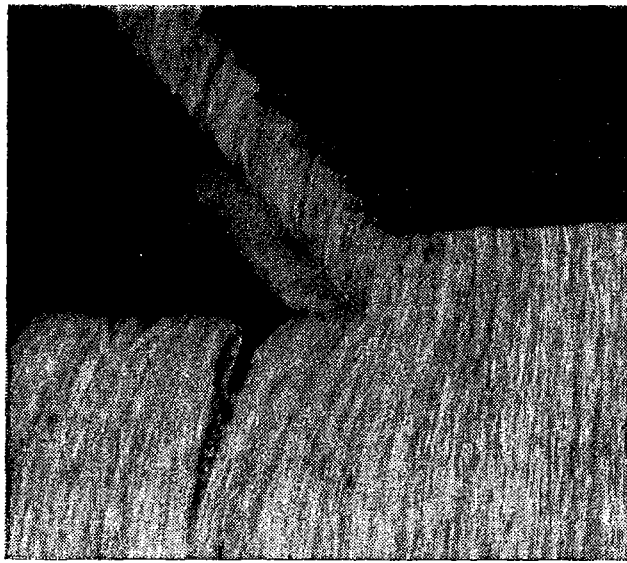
Typical result of end-grain cutting. Splitting below the cutting plane damages the new surface.
